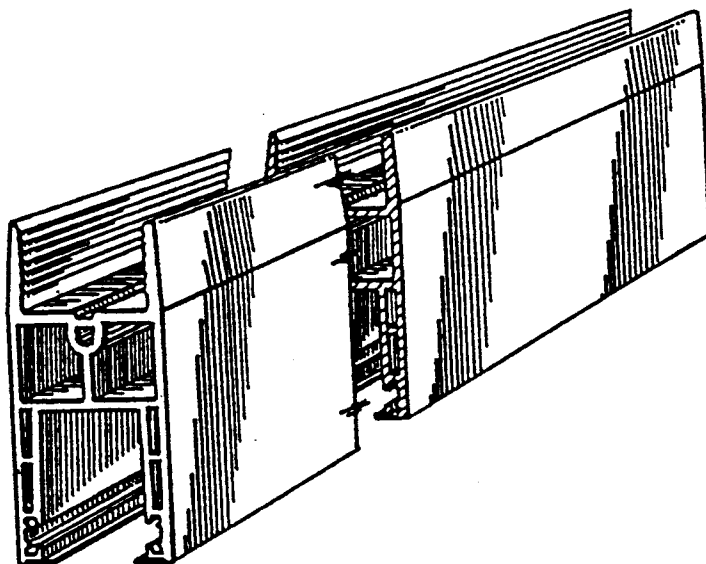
is a top perspective view of a second embodiment of the door horizontal rail extrusion showing our new design; and,
